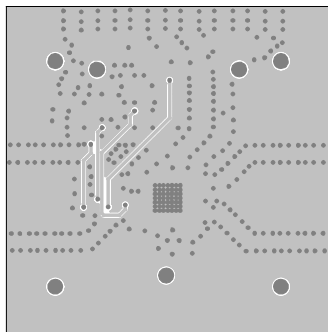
SKY65185 Evaluation Board Assembly Drawing
